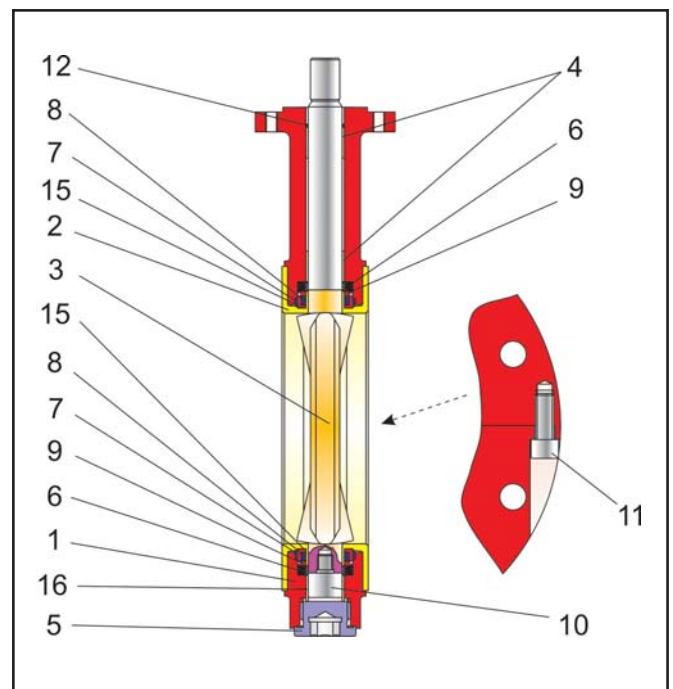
Sectional drawing of Series 10e Butterfly Valve => See list of parts on page 2
